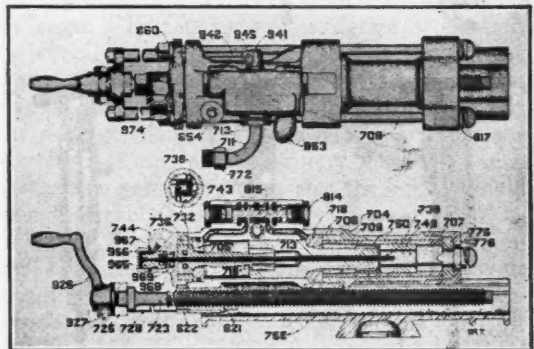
CROSS SECTION NO. 7 WATER LEYNER DRILL, MODEL 6.
